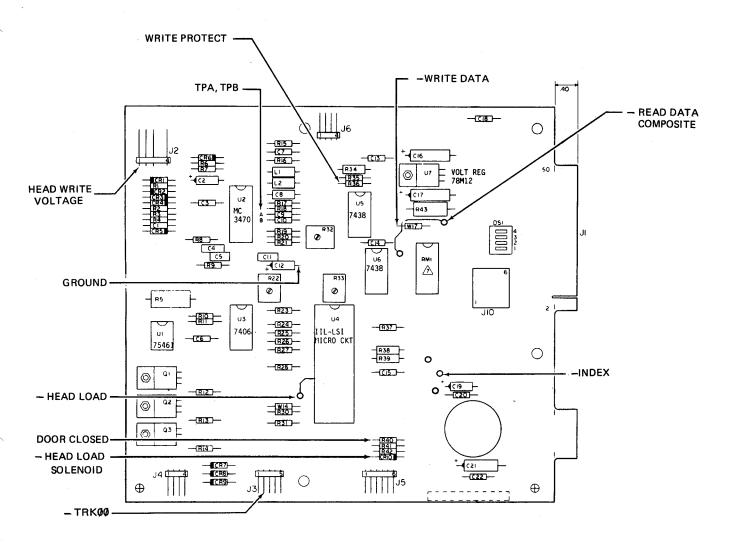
CDC Model 9404B PCB Test Points and Component Locations.
